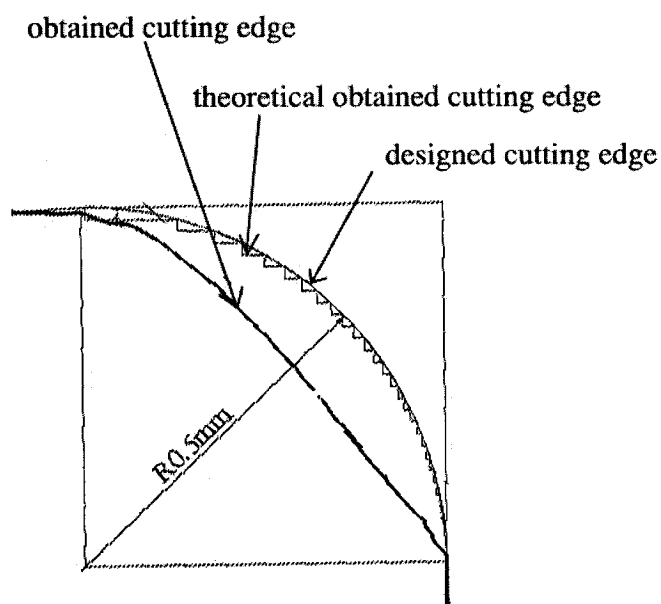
Comparison of laser machined cutting edge to desired cutting edge.
